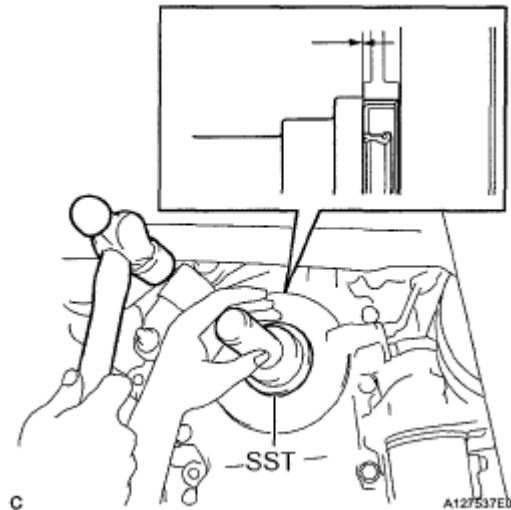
Tapping In Oil Seal Until Its Surface Is Flush With Rear Oil Seal Retainer Edge
